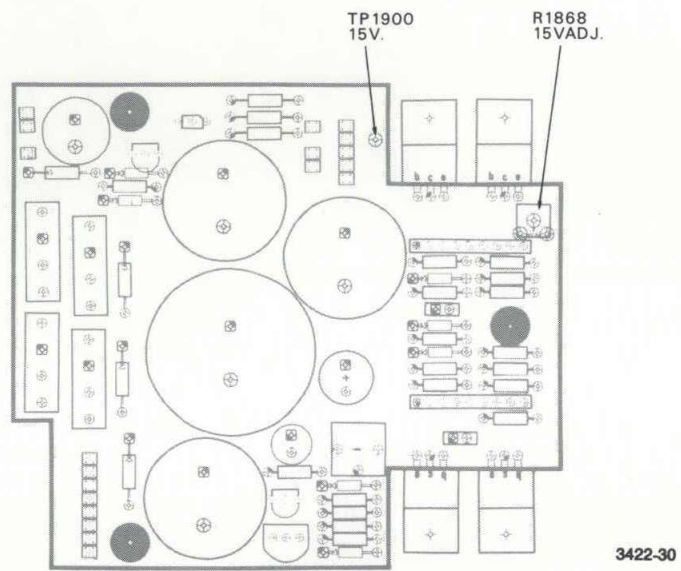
A7 LV BOARD ADJUSTMENT LOCATIONS
